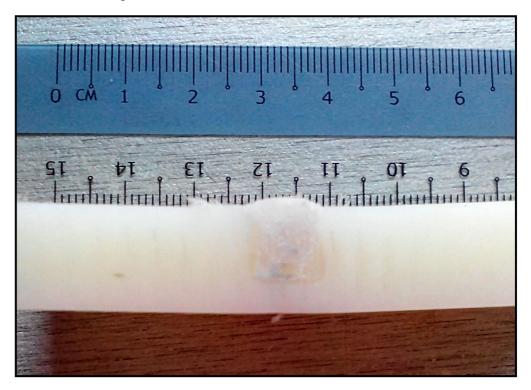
Cross-section of the butt weld joint at 30 mm/min without markers
